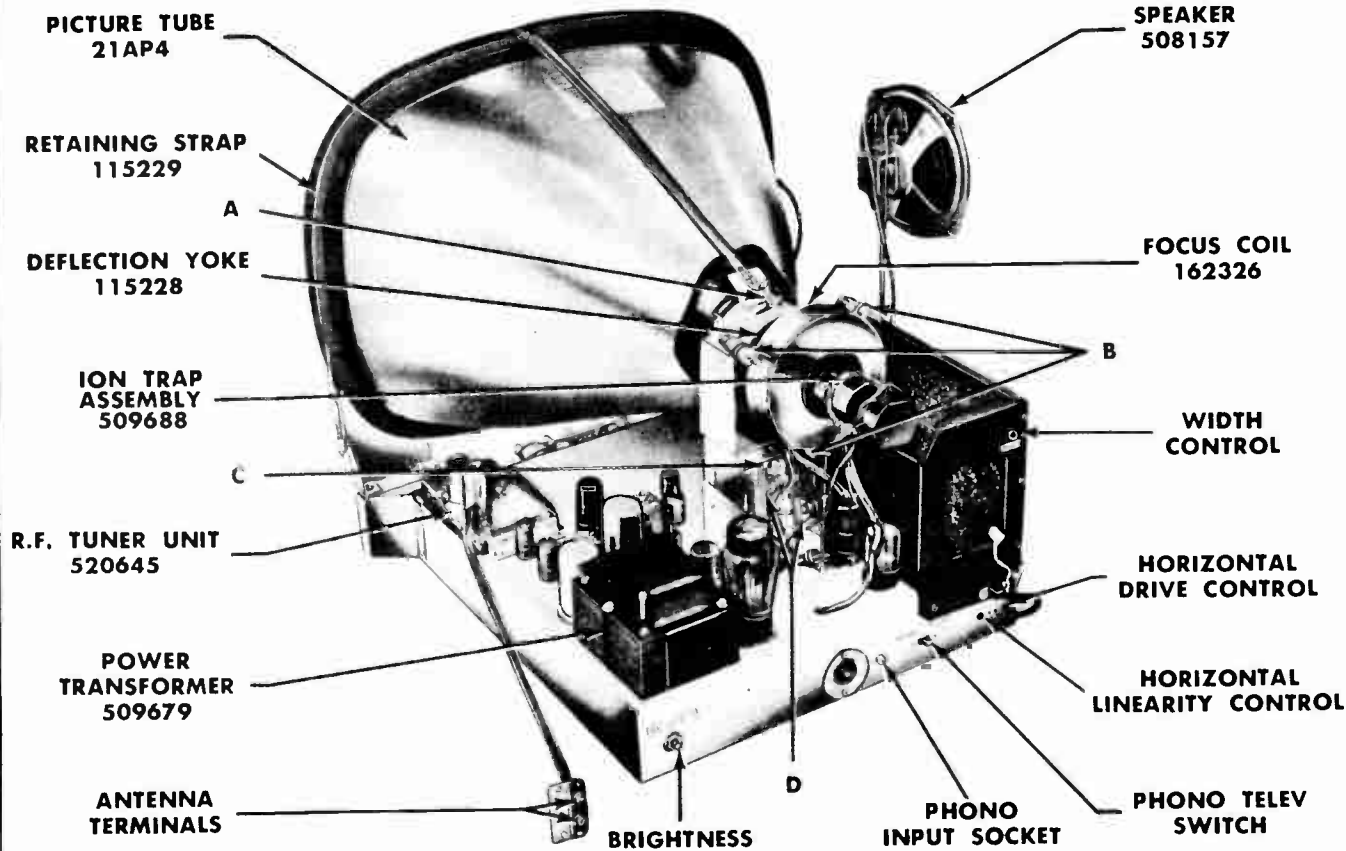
CHASSIS AND PICTURE TUBE ASSEMBLY
